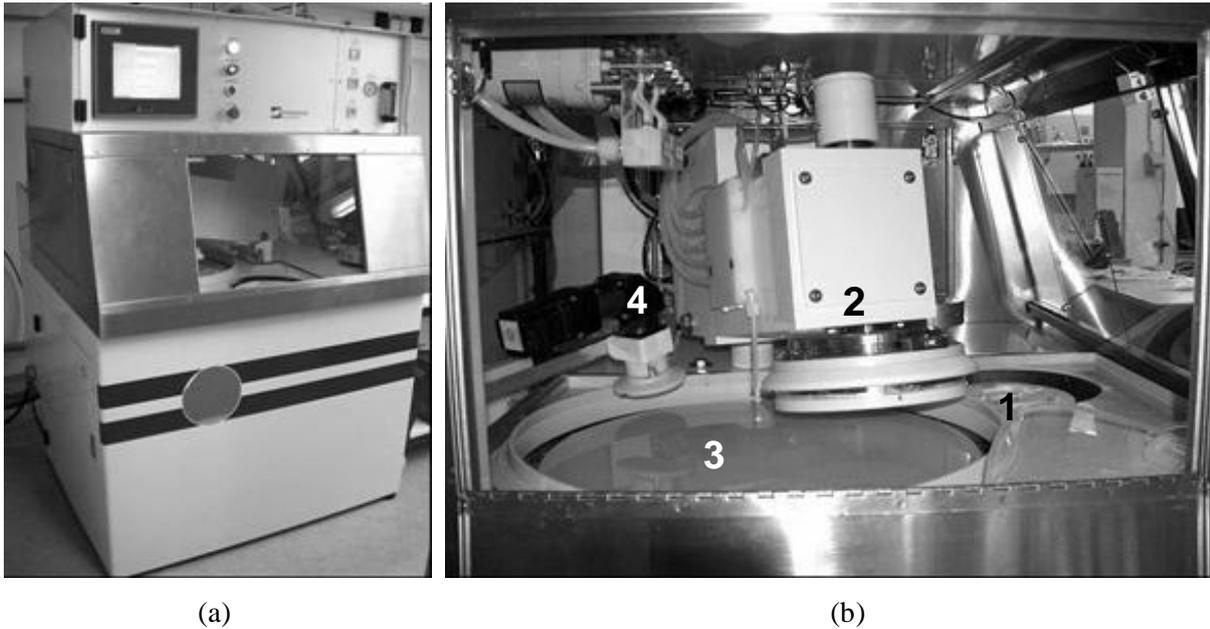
Photographs of (a) the Strasbough 6EC polisher and (b) its work chamber with loading station (1), overarm and carrier (2), polish table and pad (3) and pad conditioner (4).
